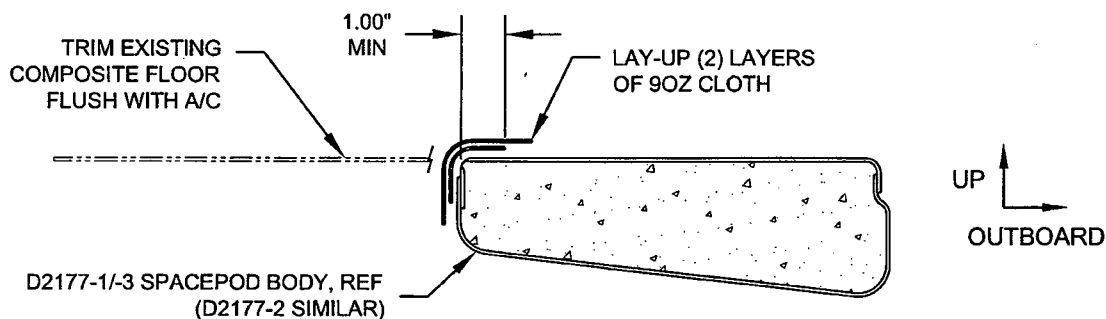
FLOOR TRIMMING / COMPOSITE LAY-UP DETAIL
